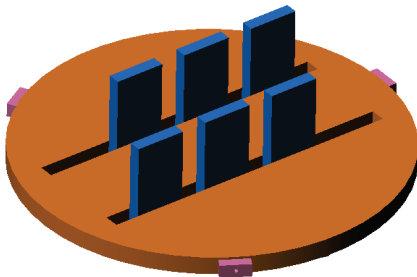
Conceptual embodiment of an adjustable print head assembly.
